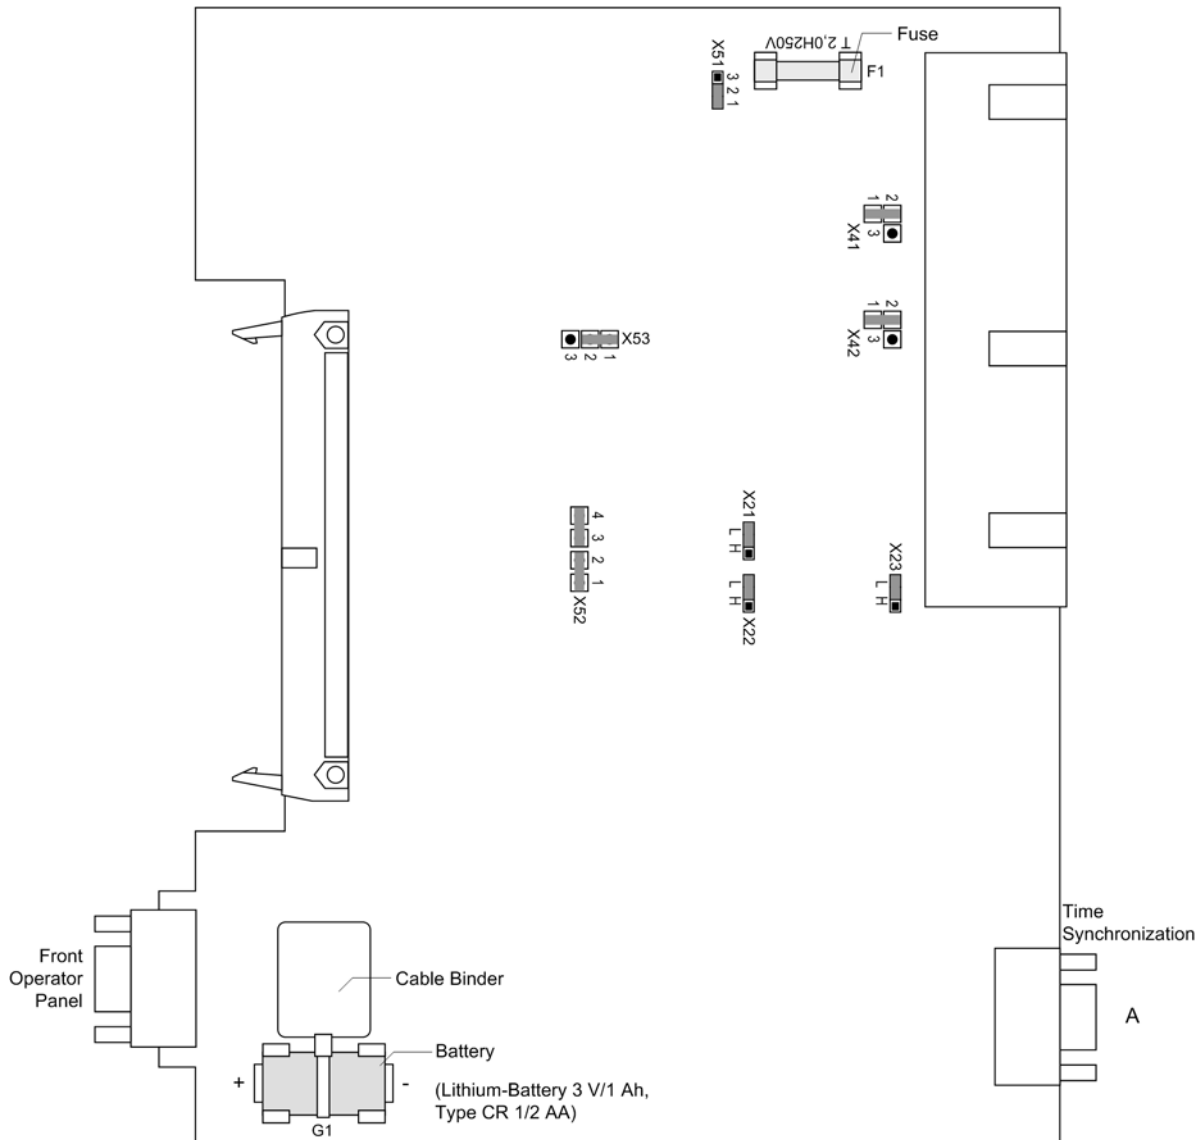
Processor printed circuit board A-CPU for devices .../EE and higher with jumpers settings required for the board configuration
